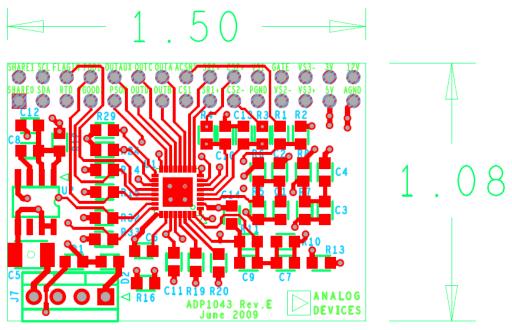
Figure 54 - Figure 53 - Top Layer, dimensions in inches
